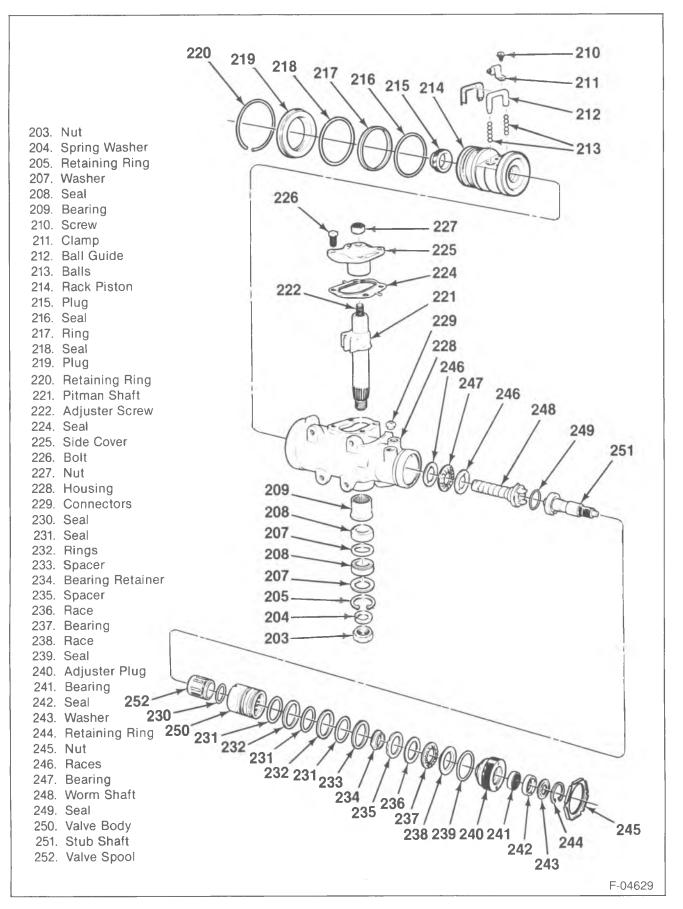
Integral Steering Gear Components — RV, G, P, ST and M Vehicles
